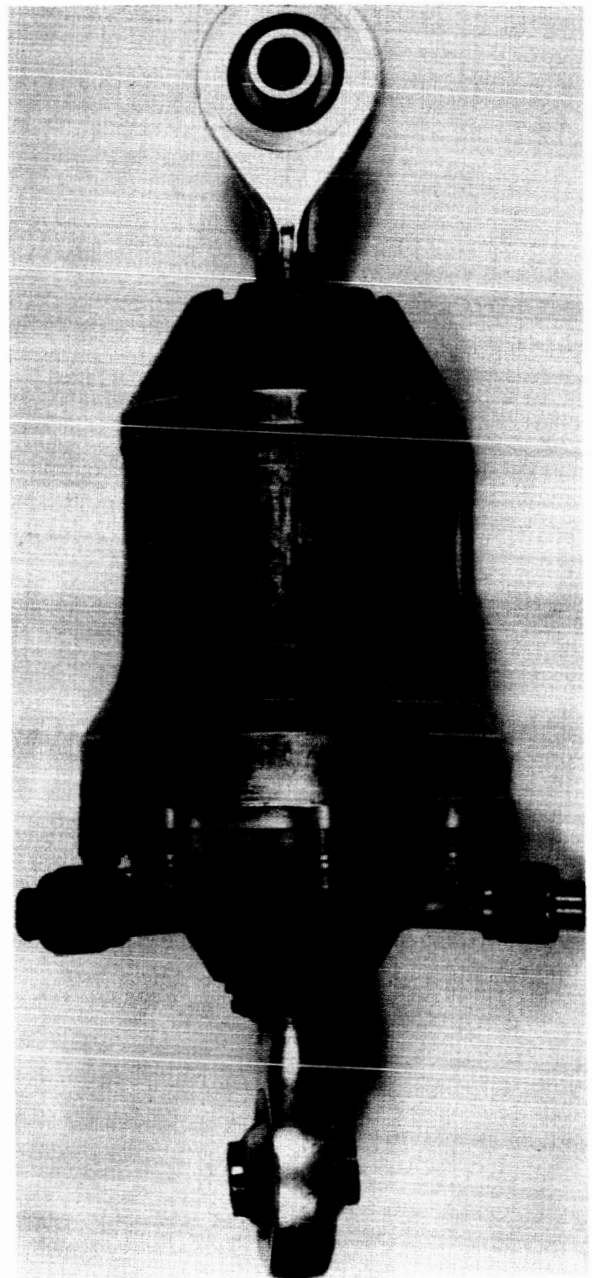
Stall-Flutter Spring-Damper Pushrod.
